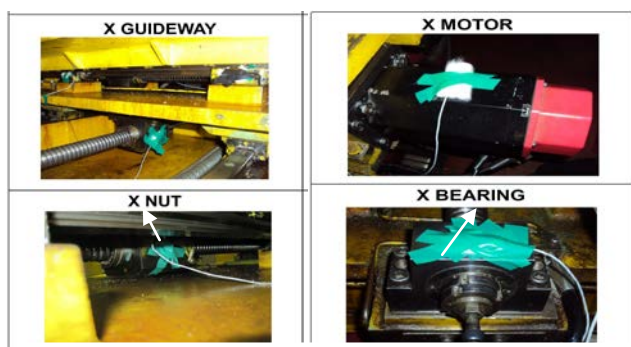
TEMPERATURE SENSORS PLACED ON GUIDEWAY, B) MOTOR C) BALL-SCREW NUT, D) END SUPPORT BEARING
